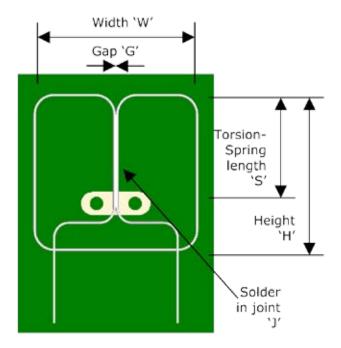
The 'window'-shaped Coriolis tube, shown with the relevant dimensions.
